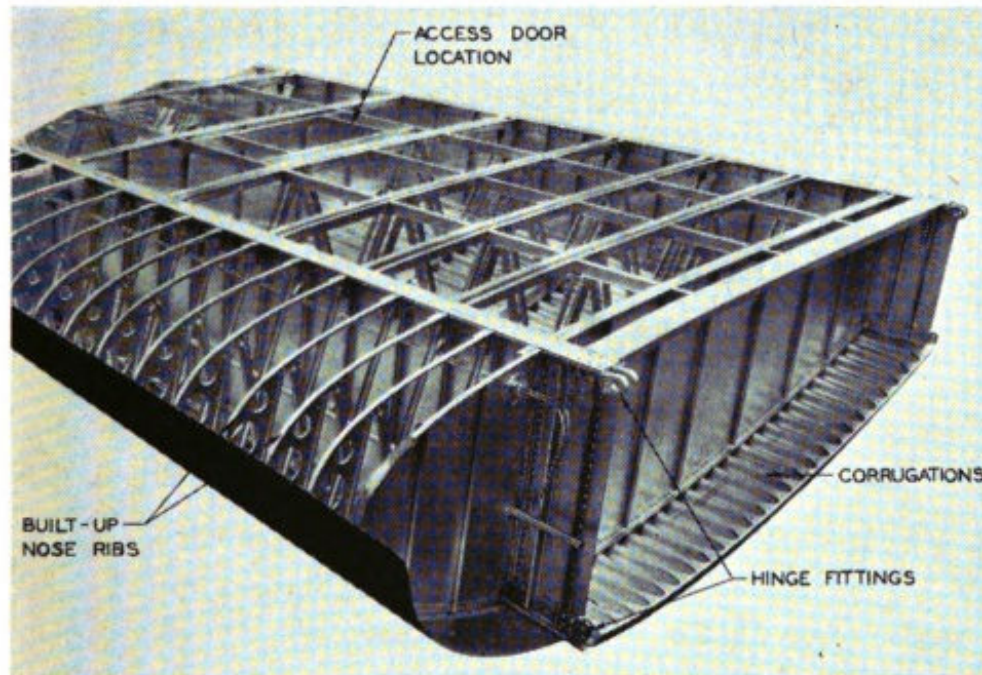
shows the box-beam assembly turned upside down after the corrugation has been covered by the upper skin. During the skinning operation rivets are driven which will attach the skin, corrugations and spar flanges together. In Fig. 14 it may be seen that the flattened portion of the corrugations which runs spanwise above the spar flanges has not been riveted at this stage of the assembly.
